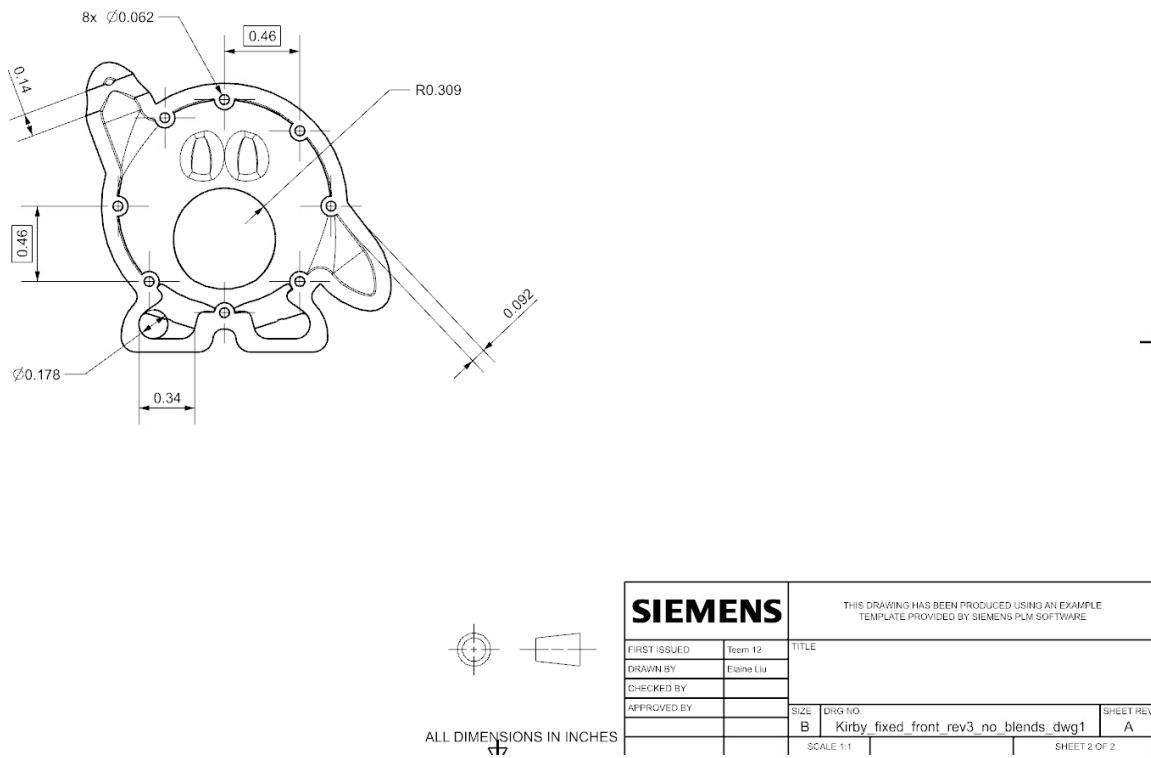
Dimensioned CAD Drawing of Kirby's Front with Dowel Inserts (Sheet 2/2)
